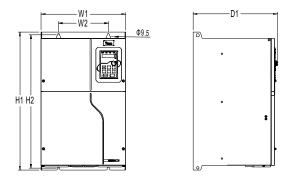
380V 110-132kW VFD wall-mounting diagram
